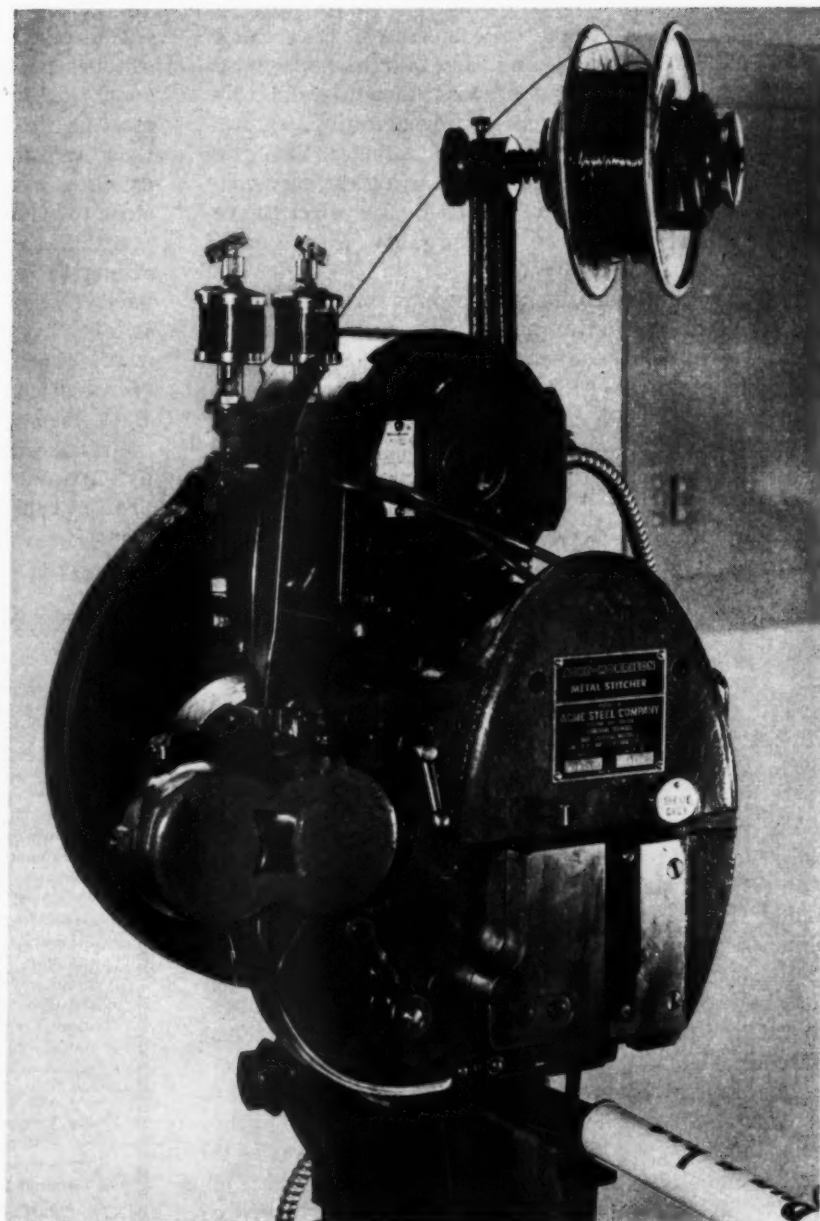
Typical stitcher showing tubular part being fastened to wood plug piece
